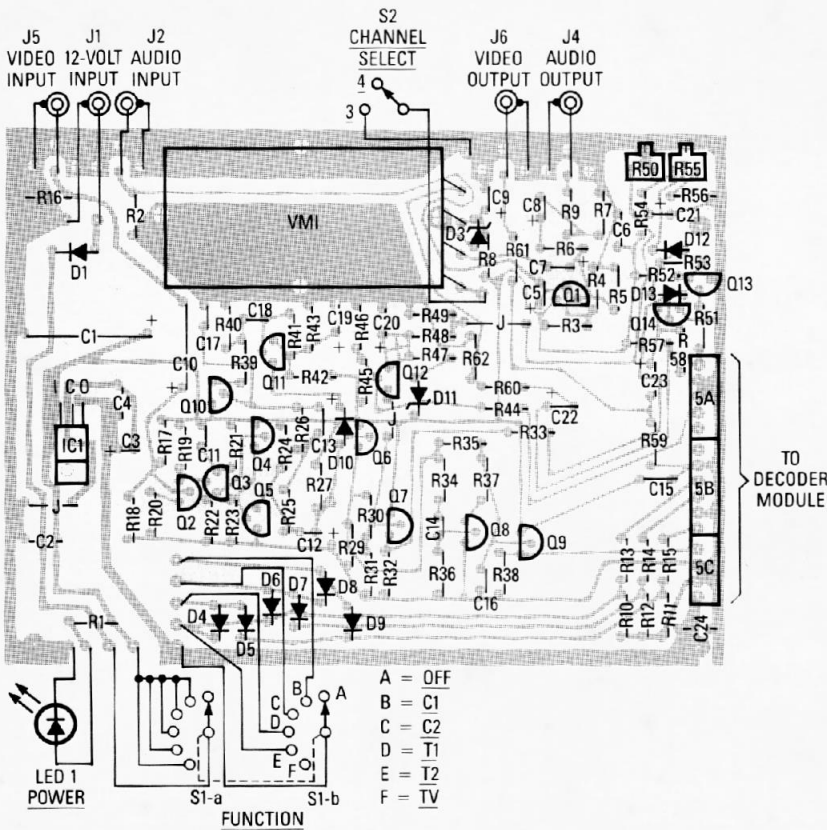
MOST COMPONENTS EXCEPT THE SWITCHES AND J1 mount on the PC board. Use PC-board pins to connect the off-board components.
